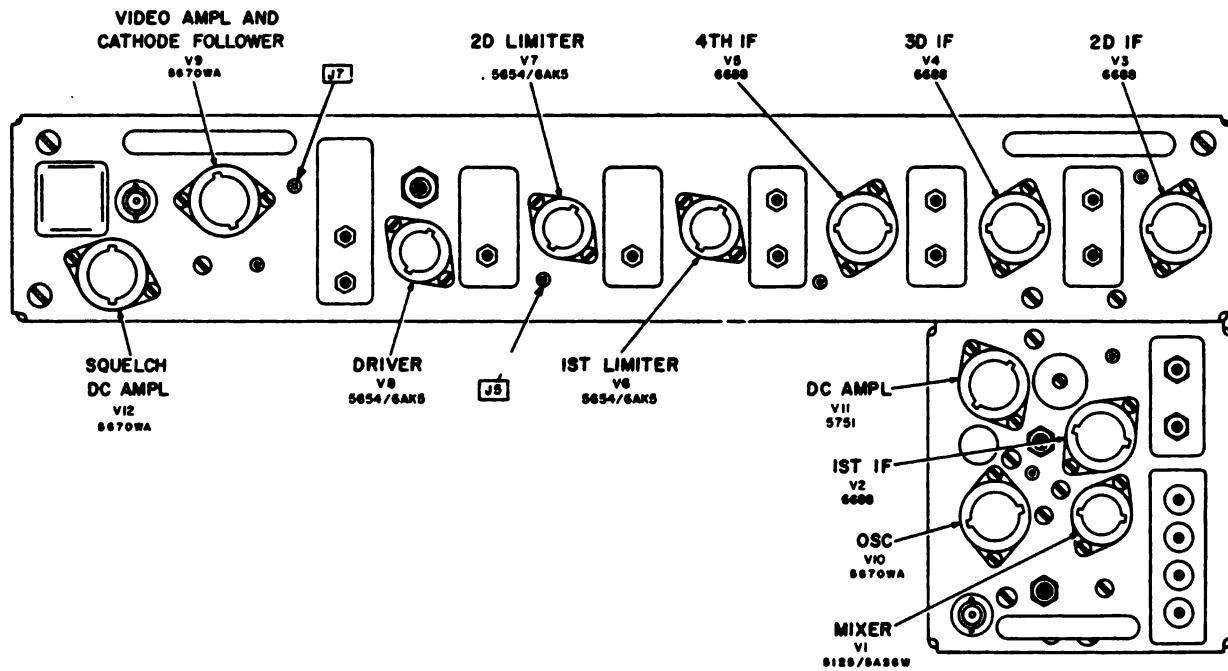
Modulator assembly 2A5 (part of T-893(P)/GRC), tube locations.
